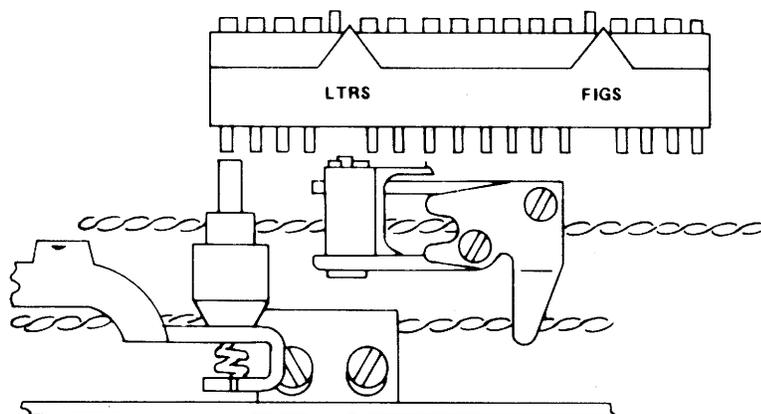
Printing Carriage Position Adjustment (Top View).
